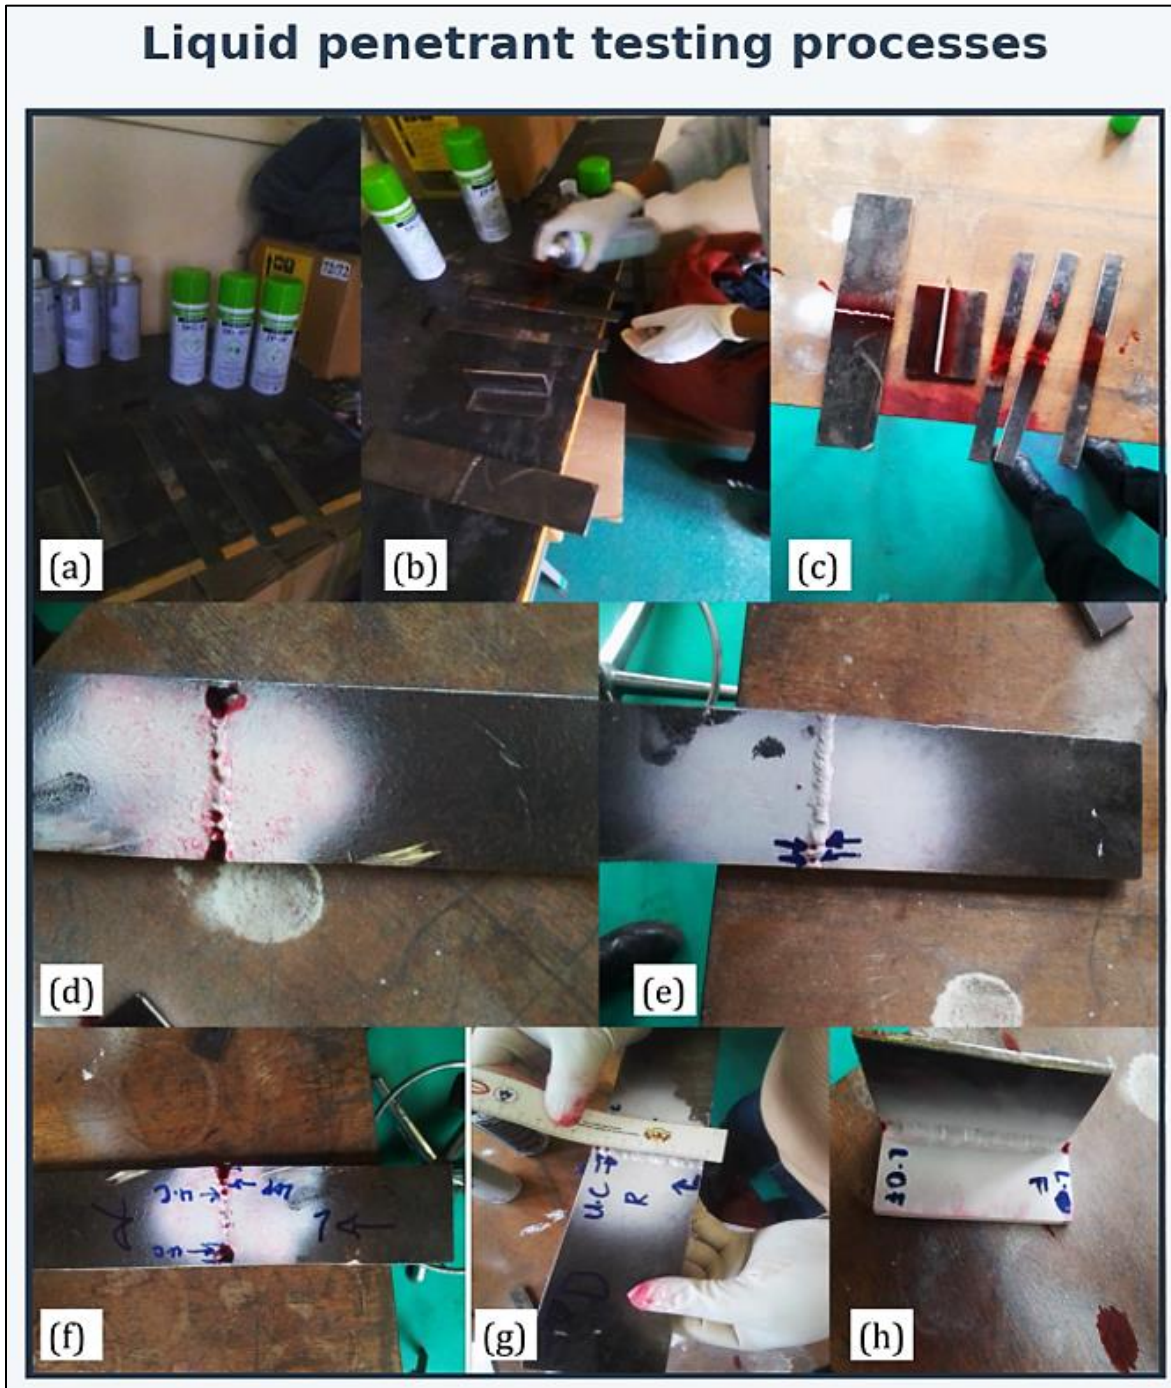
3 A practical illustration of visible dye penetrant testing on welded joints, demonstrating sequential steps from surface preparation to defect detection and evaluation
